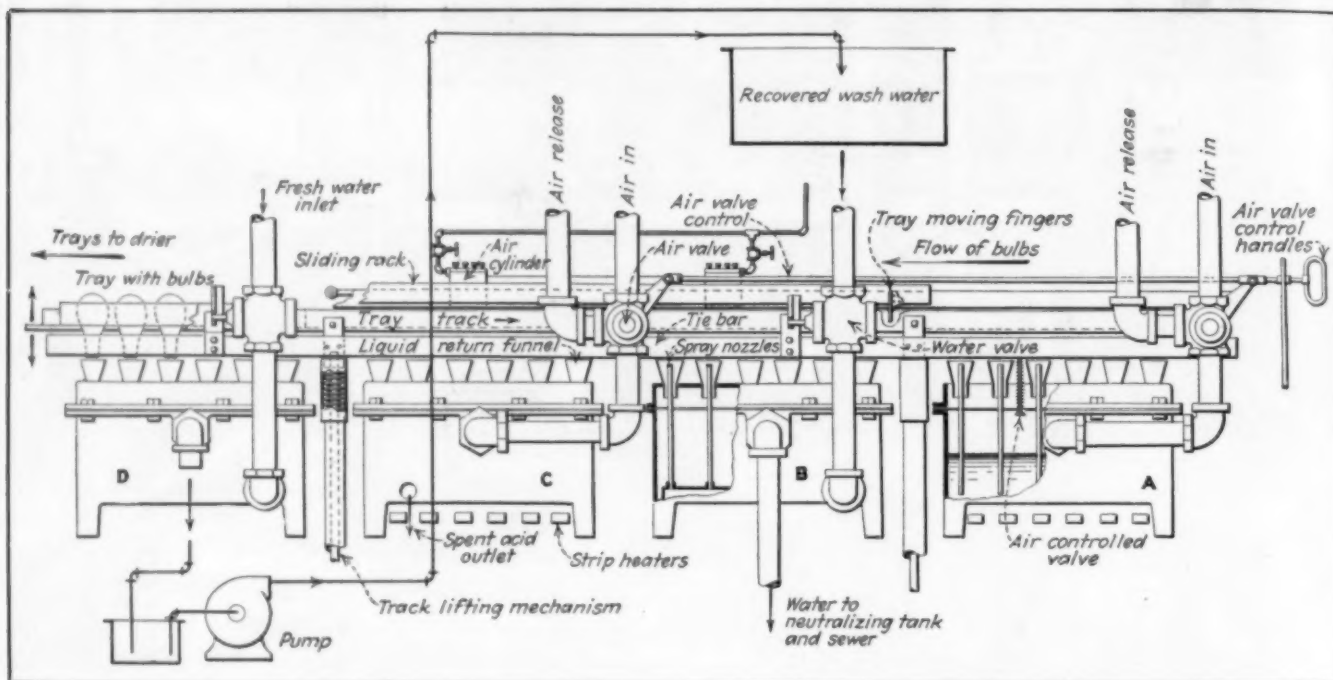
Sketch showing in detail a side elevation of the frosting machine
